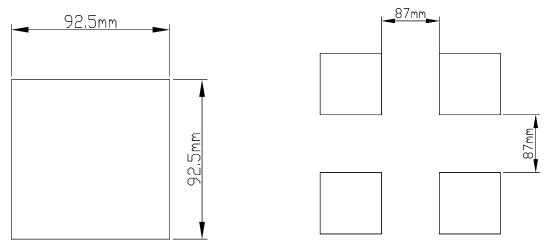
Dimensions of disk-mounted openings and minimum distance between square holes in instrument cabinets
